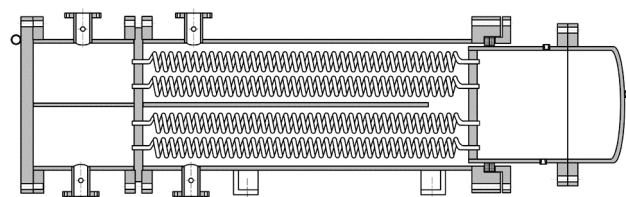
Shell and tube heat exchanger with parallel helical tube coils with external floating head
